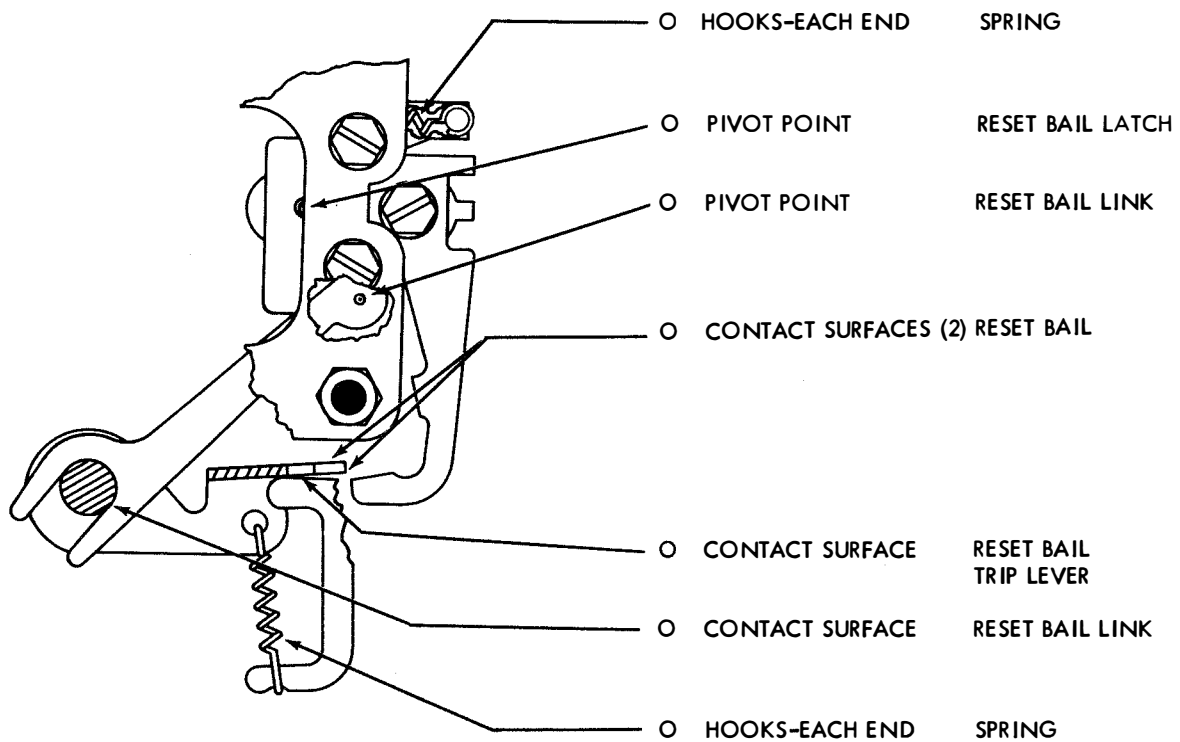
Tape Feed-Out Mechanism Lubrication
